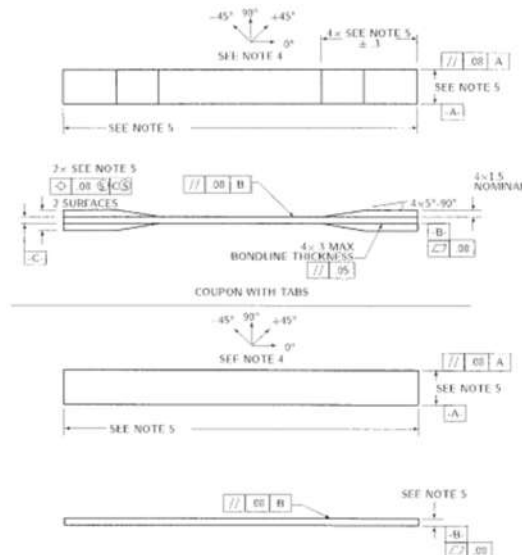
ASTM D3039 Tensile Test Specimen Dimensions [19].
